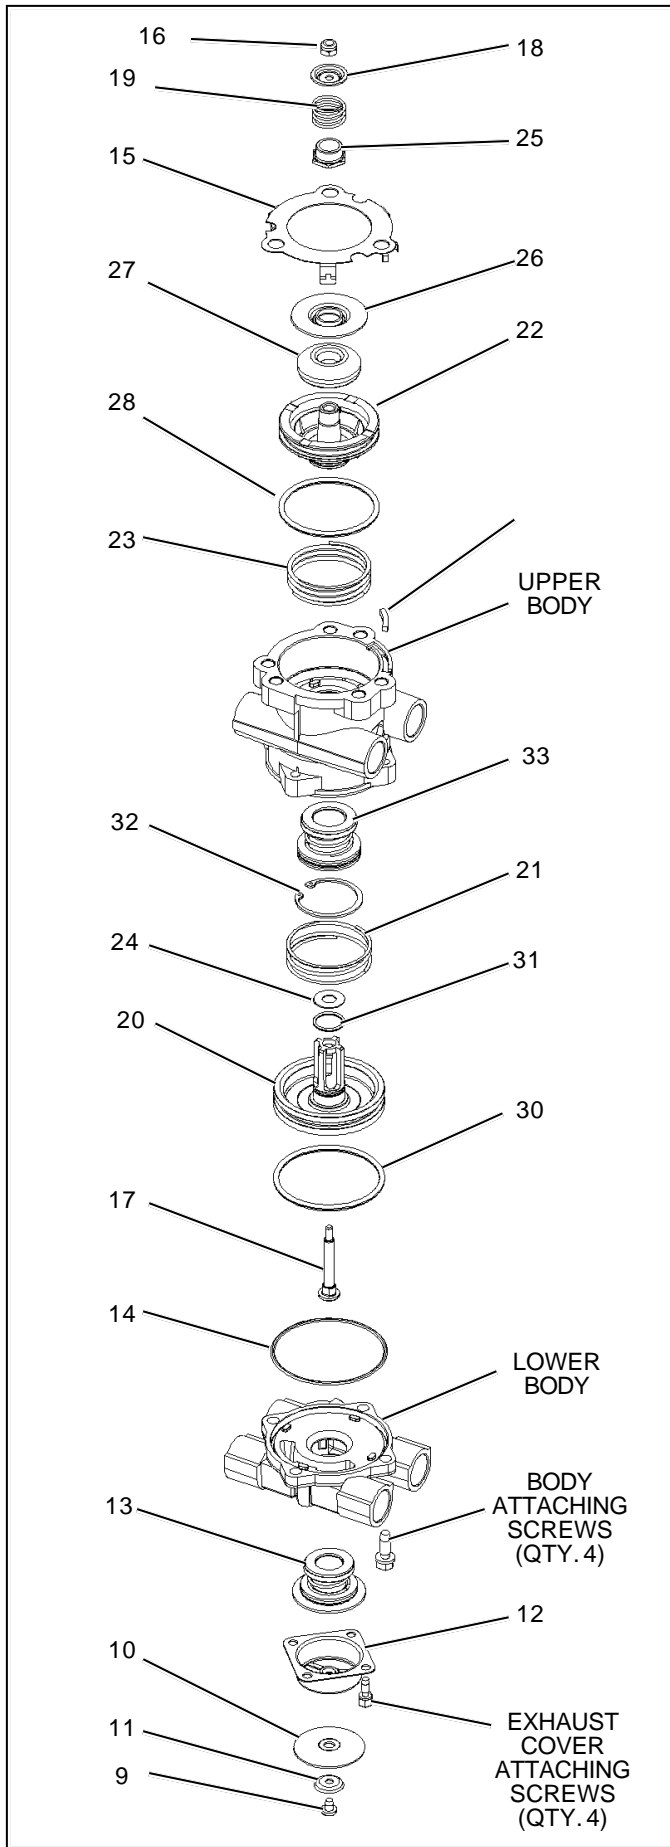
E-8P BRAKE VALVE - EXPLODED VIEW
